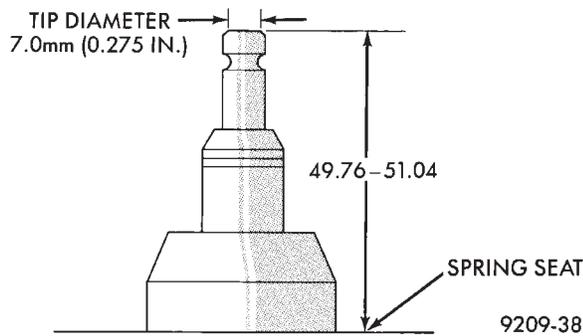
Valve Tip to Valve Spring Seat Dimensions
